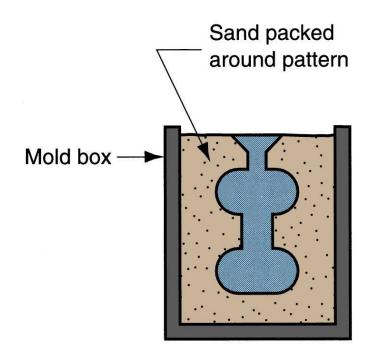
Expanded polystyrene casting process: pattern of polystyrene is coated with refractory compound;
